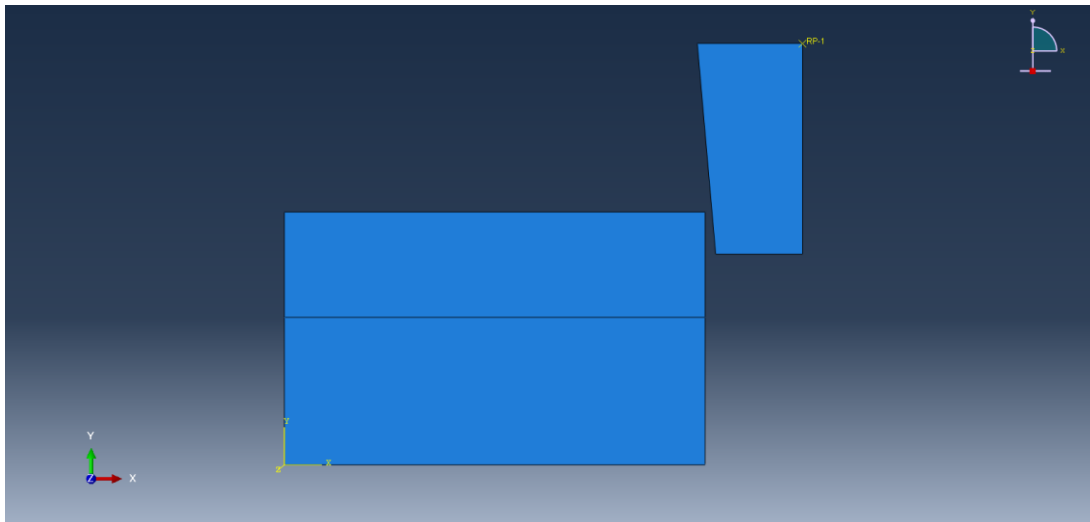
Model arrangement for S45C workpiece and cutting tool point.
